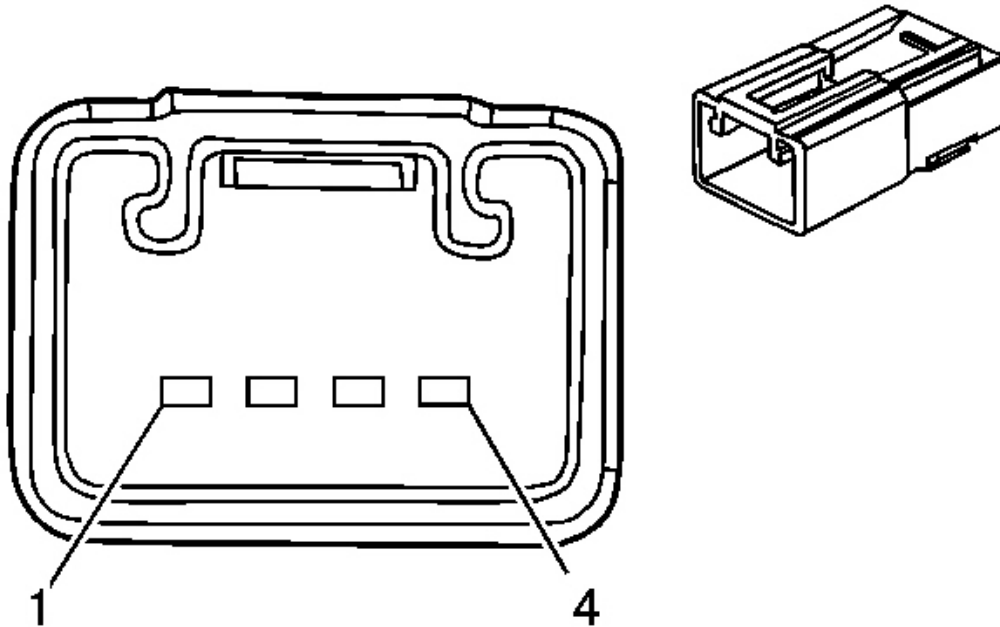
Driver Side Outside Rearview Mirror Connector End View
